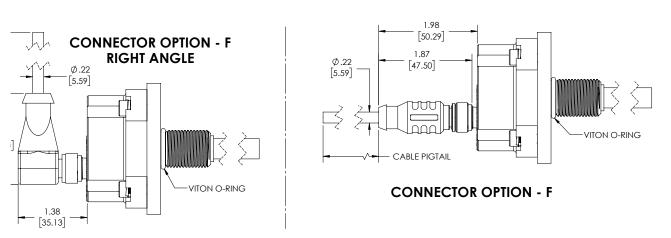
958A Compact Housing – Front Top Mount Connector Option (PD-0126600)
